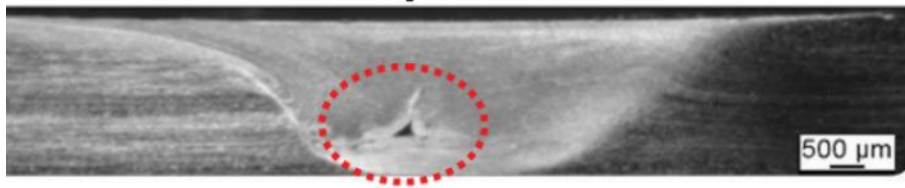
Macroscopic cross-section image of a void discontinuity in a 304 SS caused by the lack of consolidation of the material inside the weld nugget [55].
